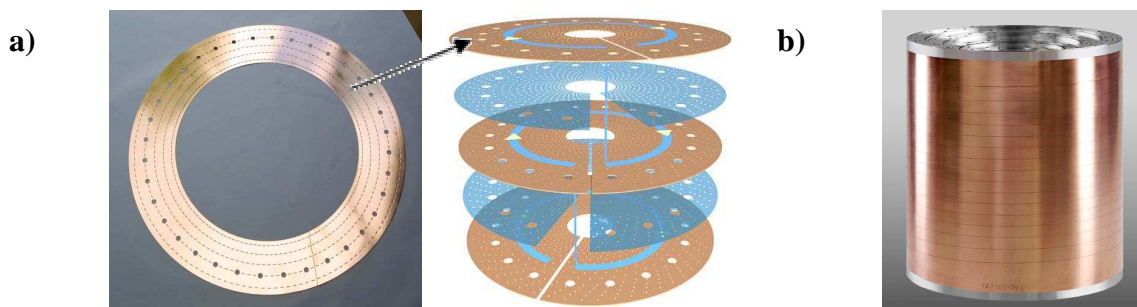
(a) Bitter disk and Bitter assembly. The inner diameter is 400 mm. (b) polyhelix assembly.
